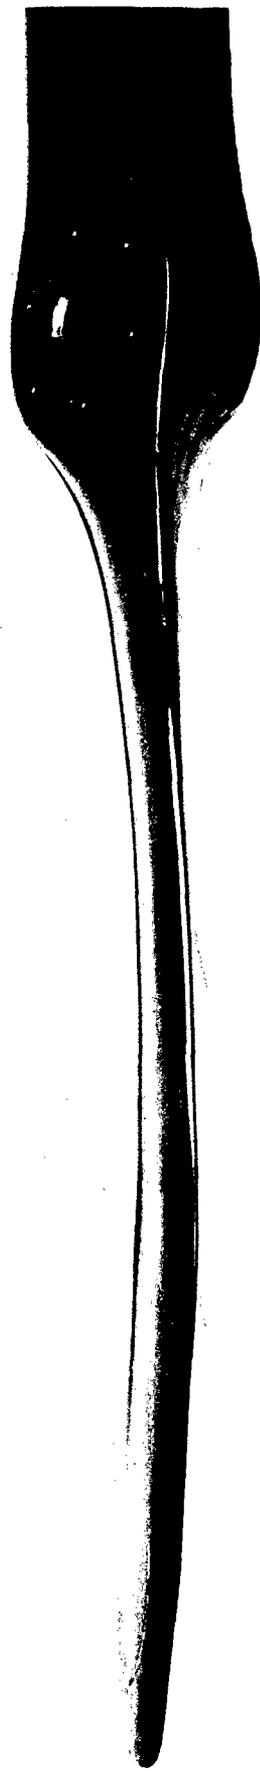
Edge View of Blade - Flottorp Standard Propeller
